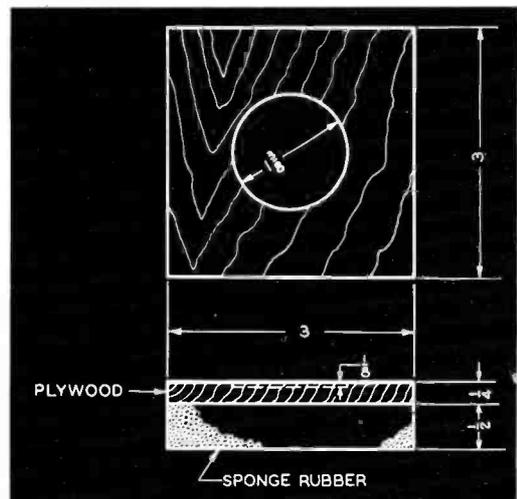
Sketch showing constructional details of the sponge-rubber shock mountings, which are made of inexpensive, easily-obtained materials.
